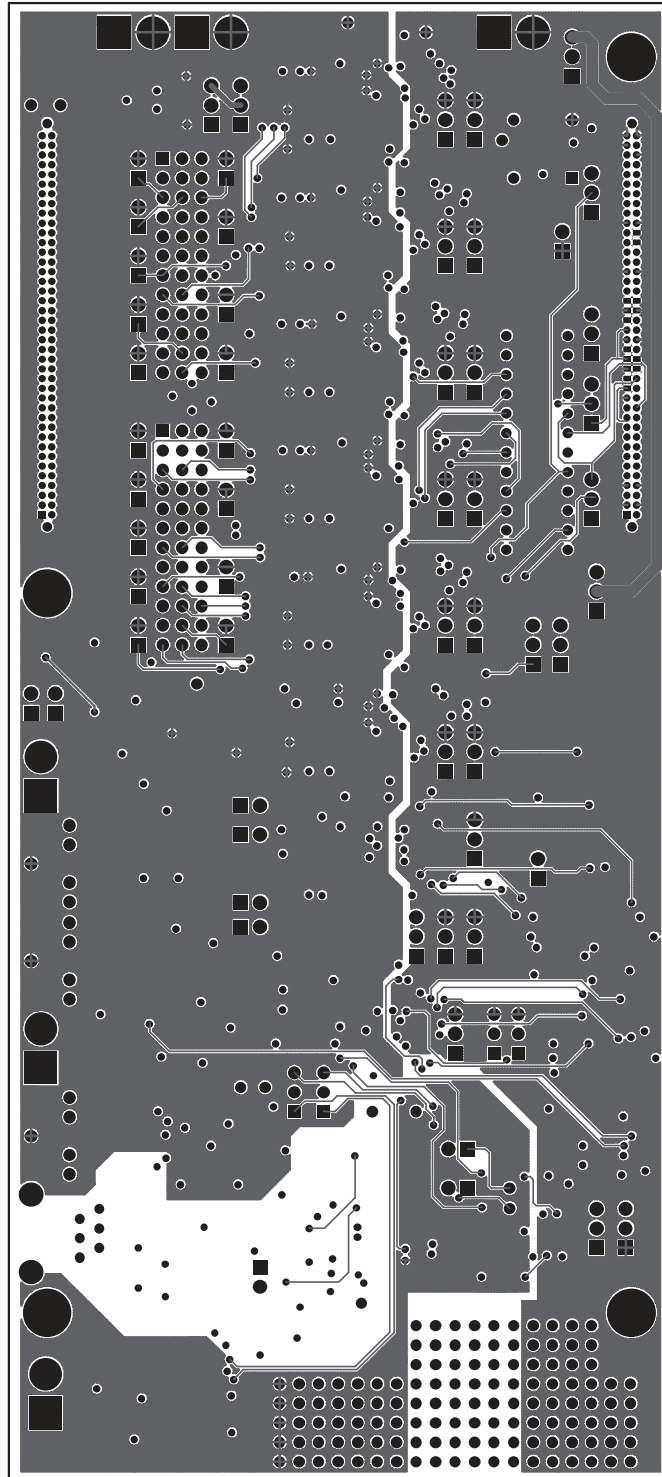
Printed-Circuit Board Layer 4 (Rev. C)
